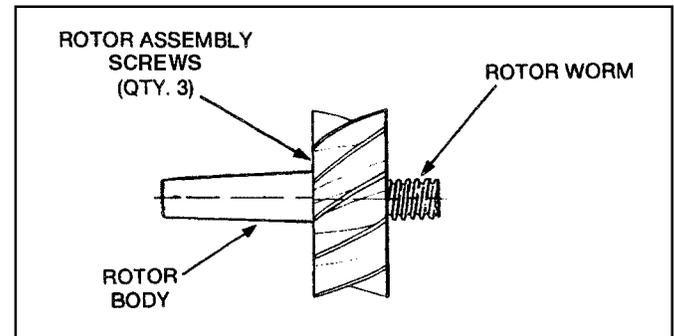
Rotor Assembly (6" - 8" Turbo Meters)
